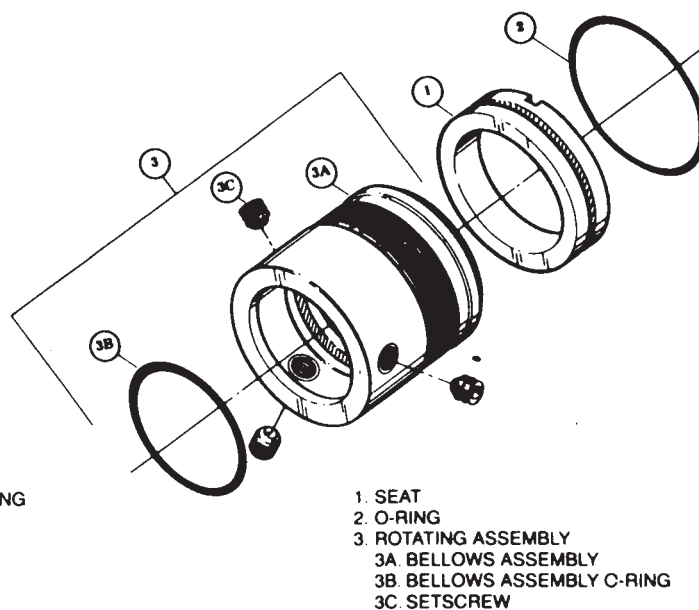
Crane Type 9 Mechanical Seal - O-ring Seat
